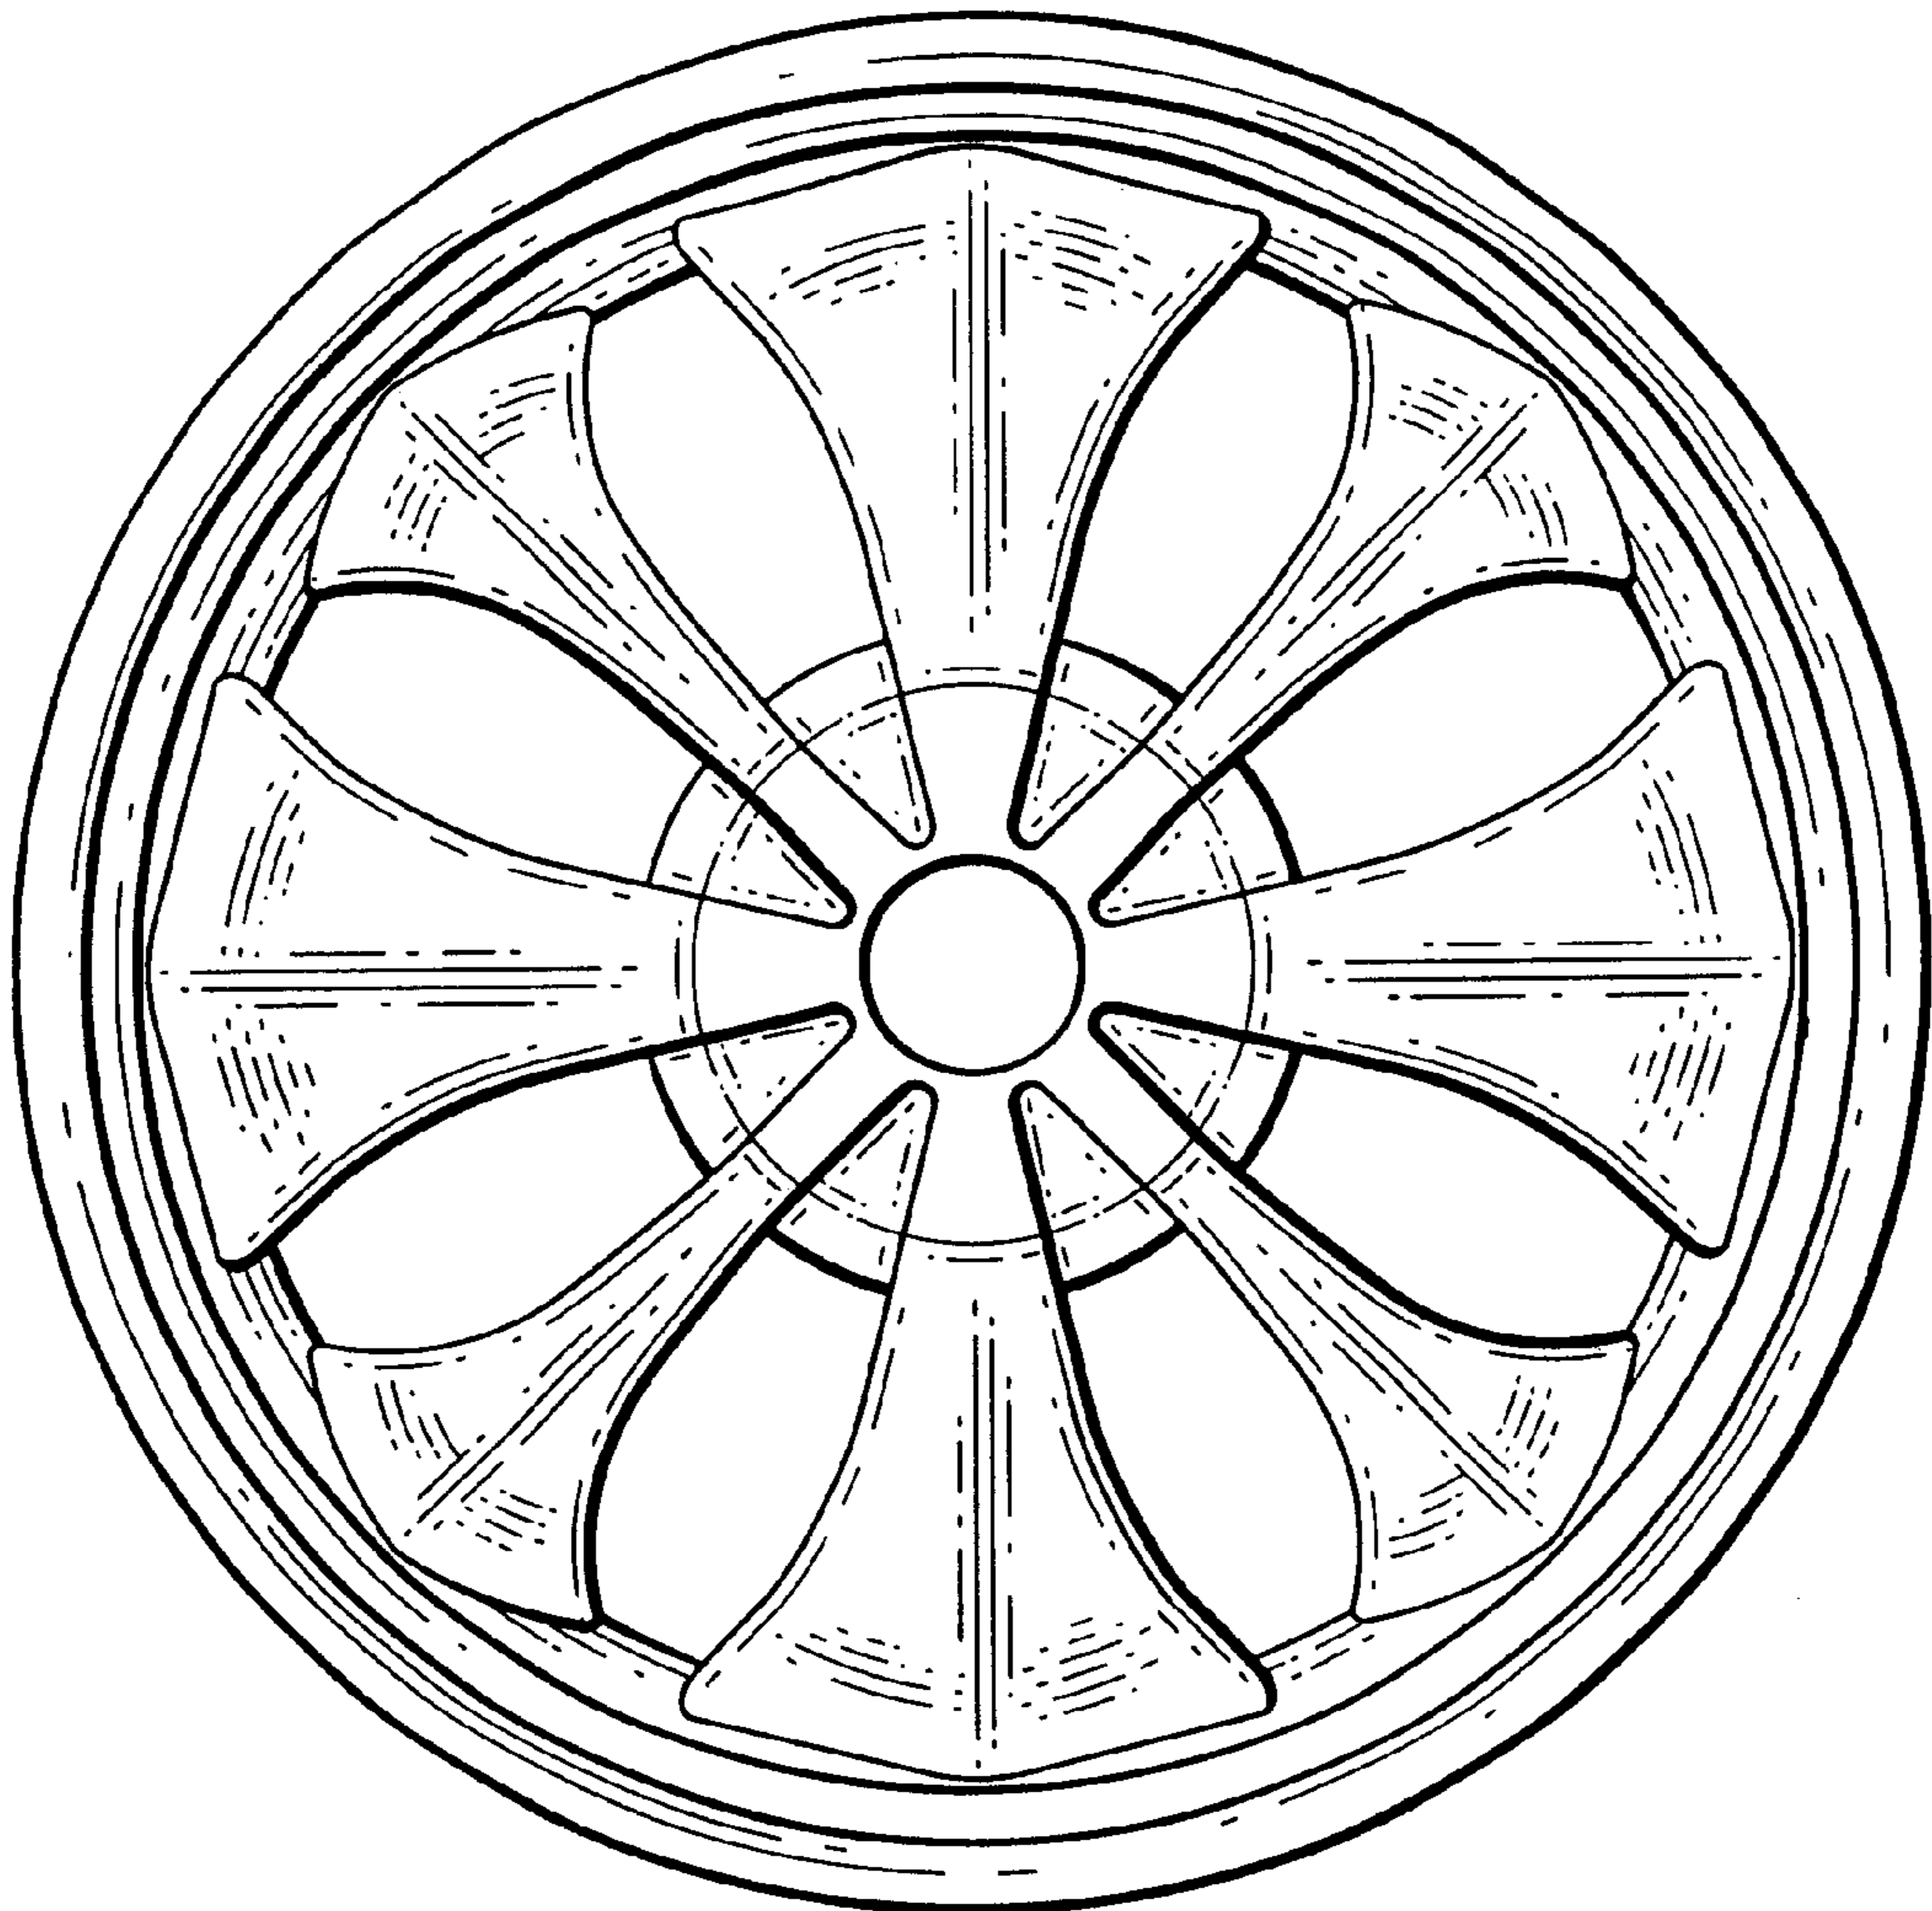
is a front and side perspective view of an automotive wheel showing my new design;
